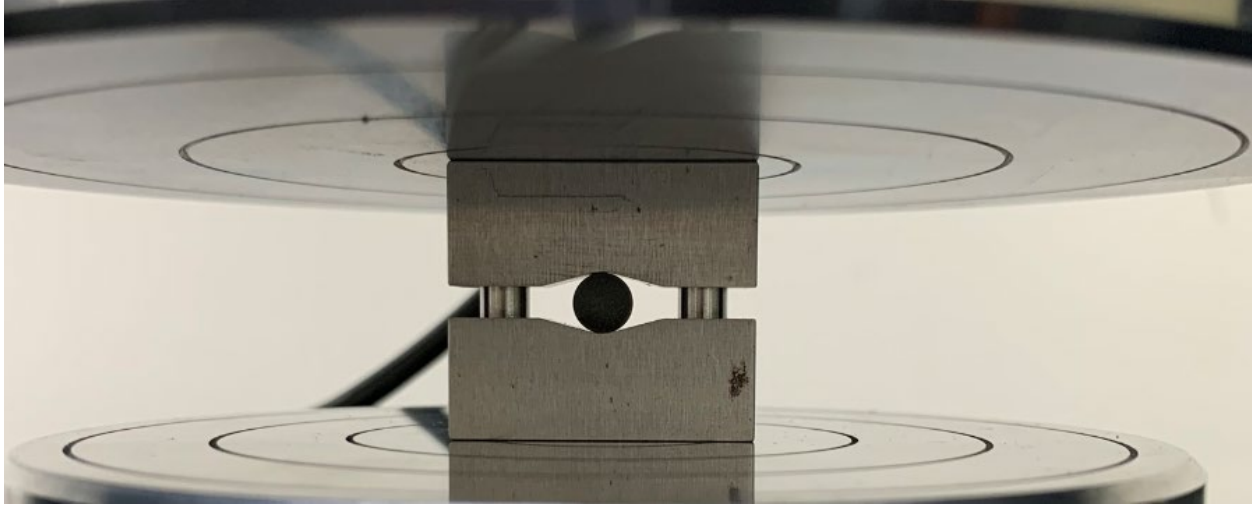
Tool steel blocks radiused to limit contact stress.^{1,4}
